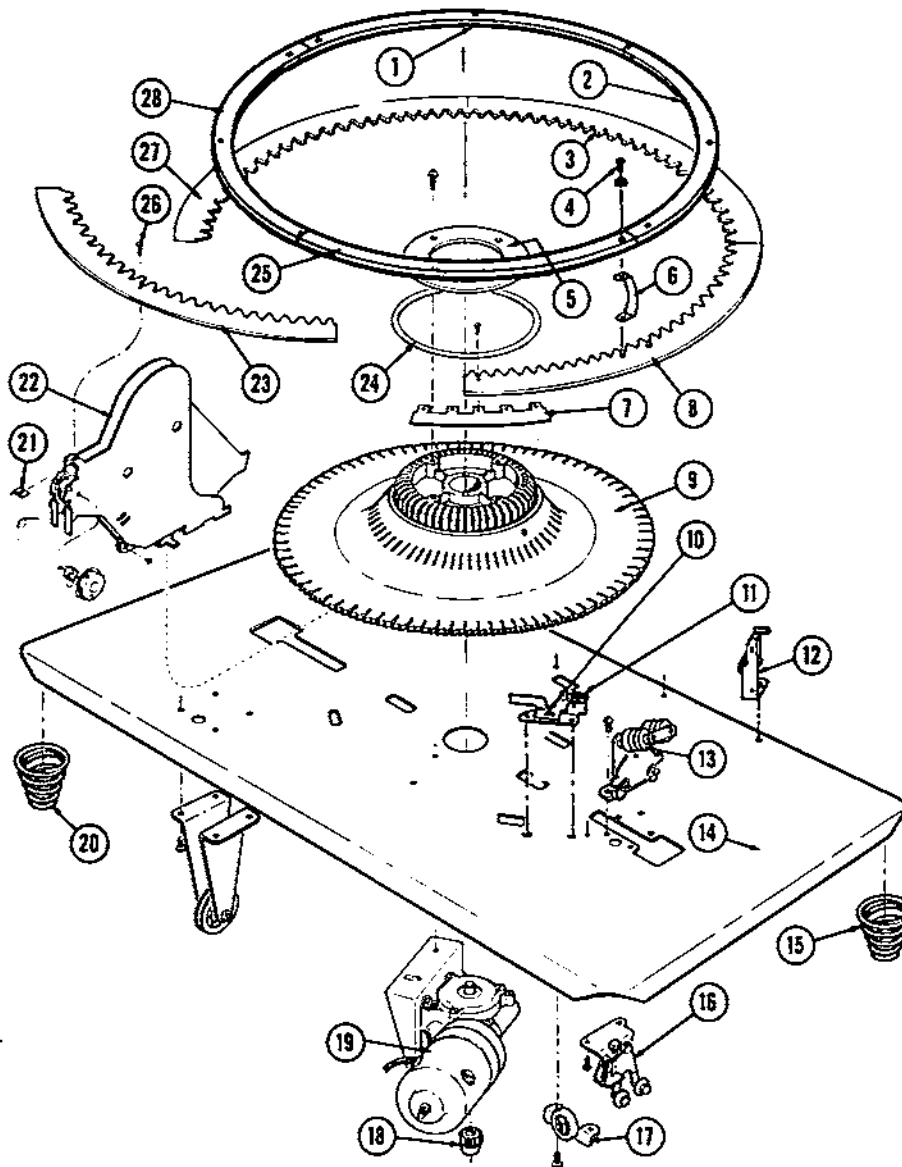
RECORD CARRIER AND CHASSIS MOUNTING PLATE 2600
